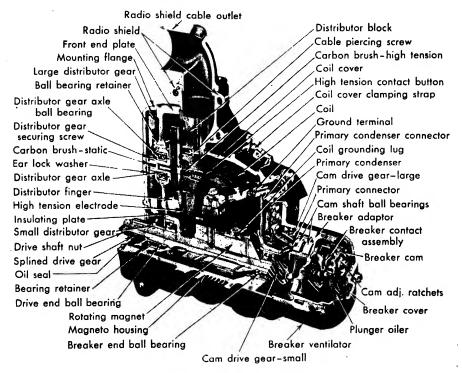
A cutaway view of an aircraft engine magneto showing its many parts. (Courtesy Scintilla Magneto Division, Bendix Aviation Corporation)
